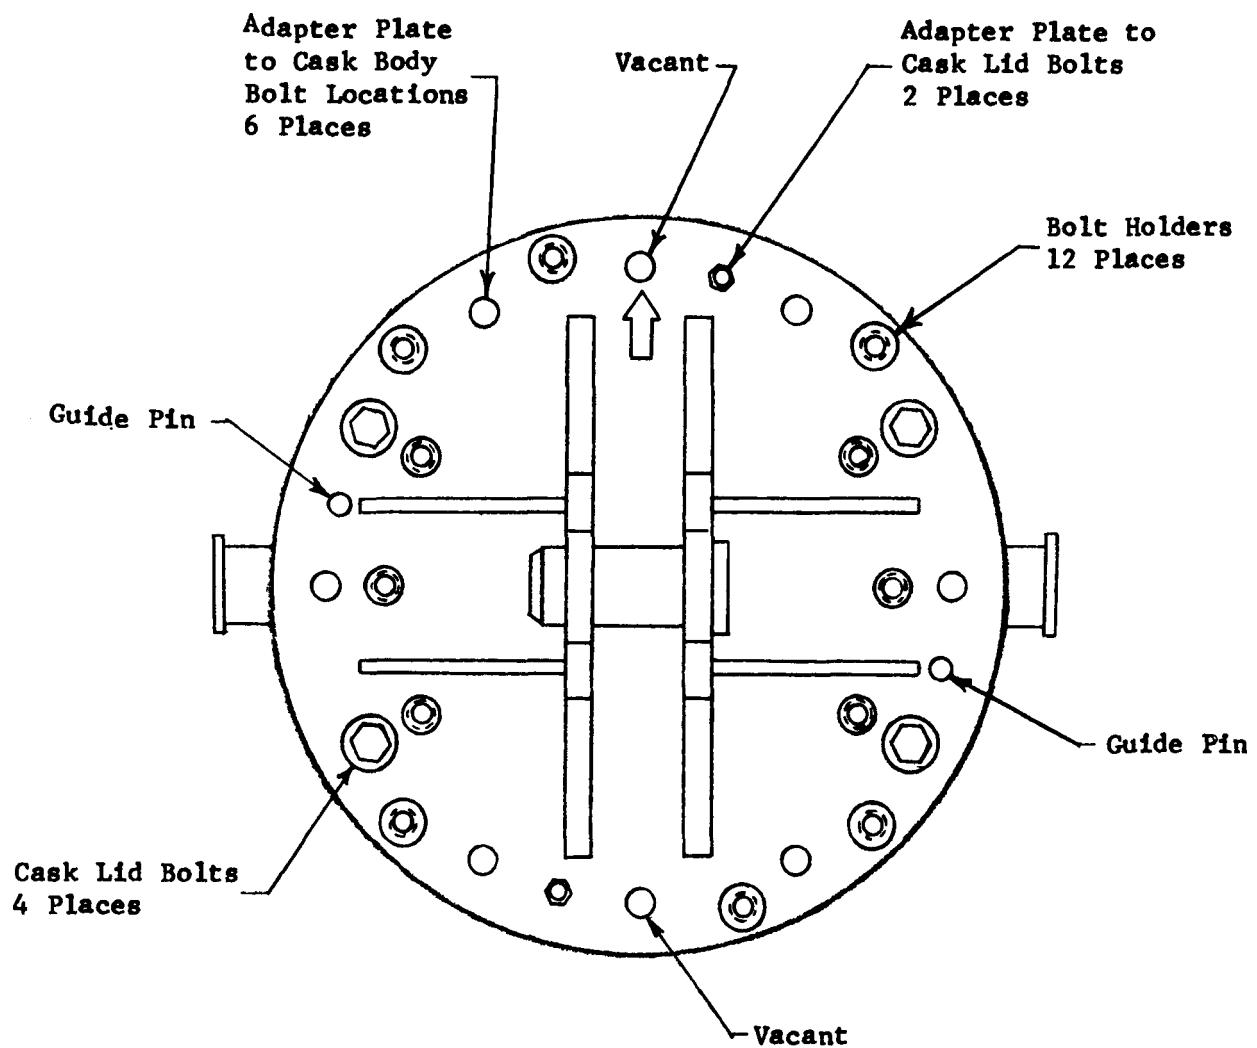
Peach Bottom Cask Adapter Plate Bolt Pattern
